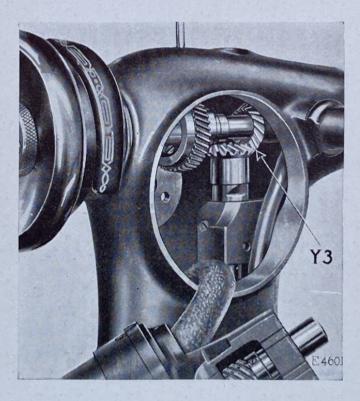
Back View, Showing Beyel Gears in Arm of Machine
